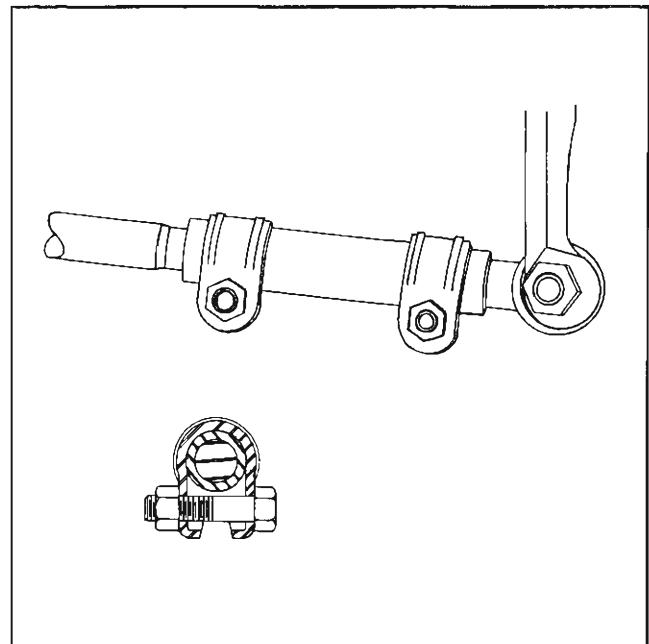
Position for Tie-rod Adjuster Sleeve Bolts
